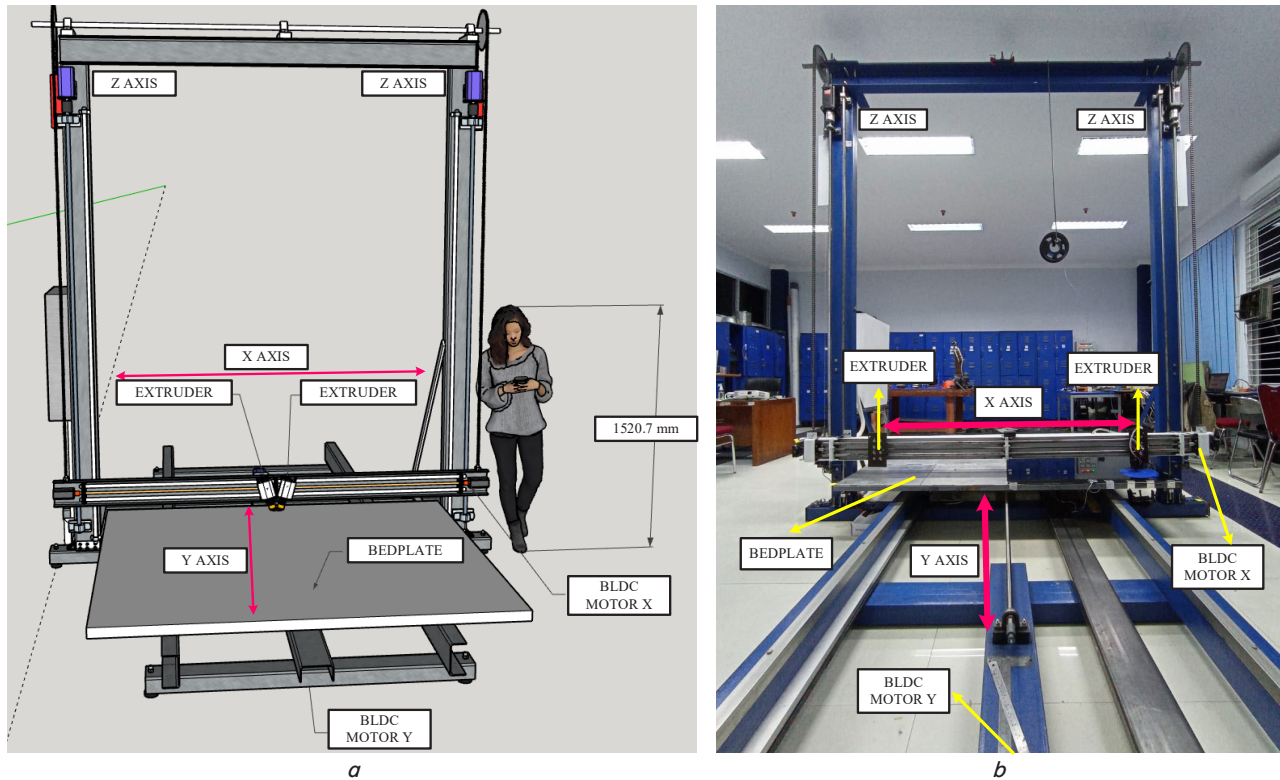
Large-scale 3D printer: *a* — mechanical design; *b* — fabricated machine
